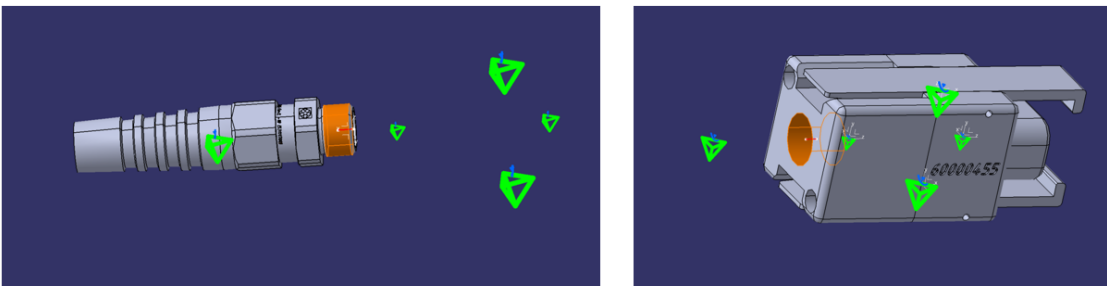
Rigid connection between cable glamp and the back part of the connector housing.
